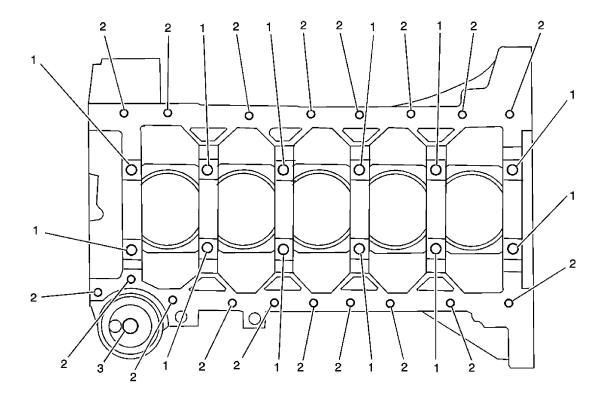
Engine Block - Bottom View Courtesy of GENERAL MOTORS CORP.
